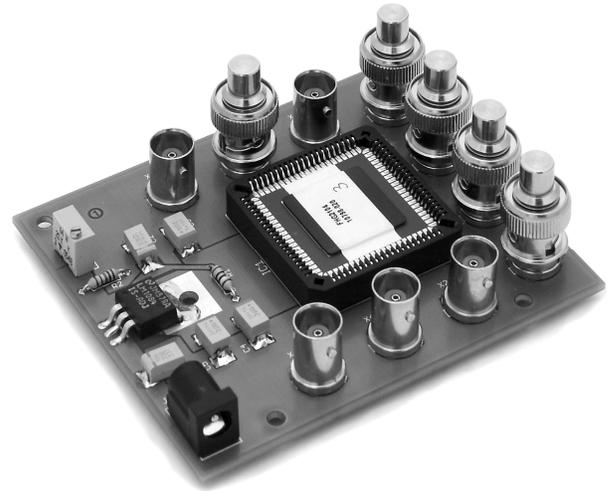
Design outcomes: ultrasonic pulser - receiver PCB utilising the designed front end ASIC
